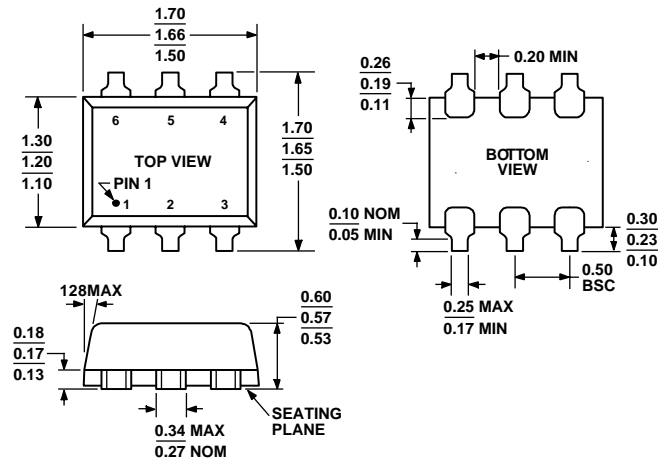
6-Lead Small Outline Transistor Package [SOT-66] (RY-6-1)
